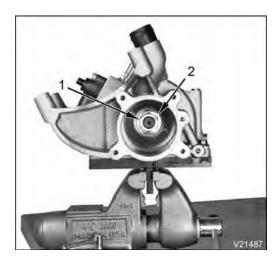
Holding Plate and Drive Housing Mounted in Vise
